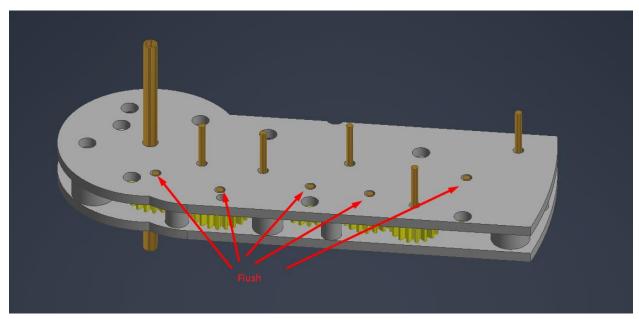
Assembly of M2 3mm hex insert bolt and M2 nut
